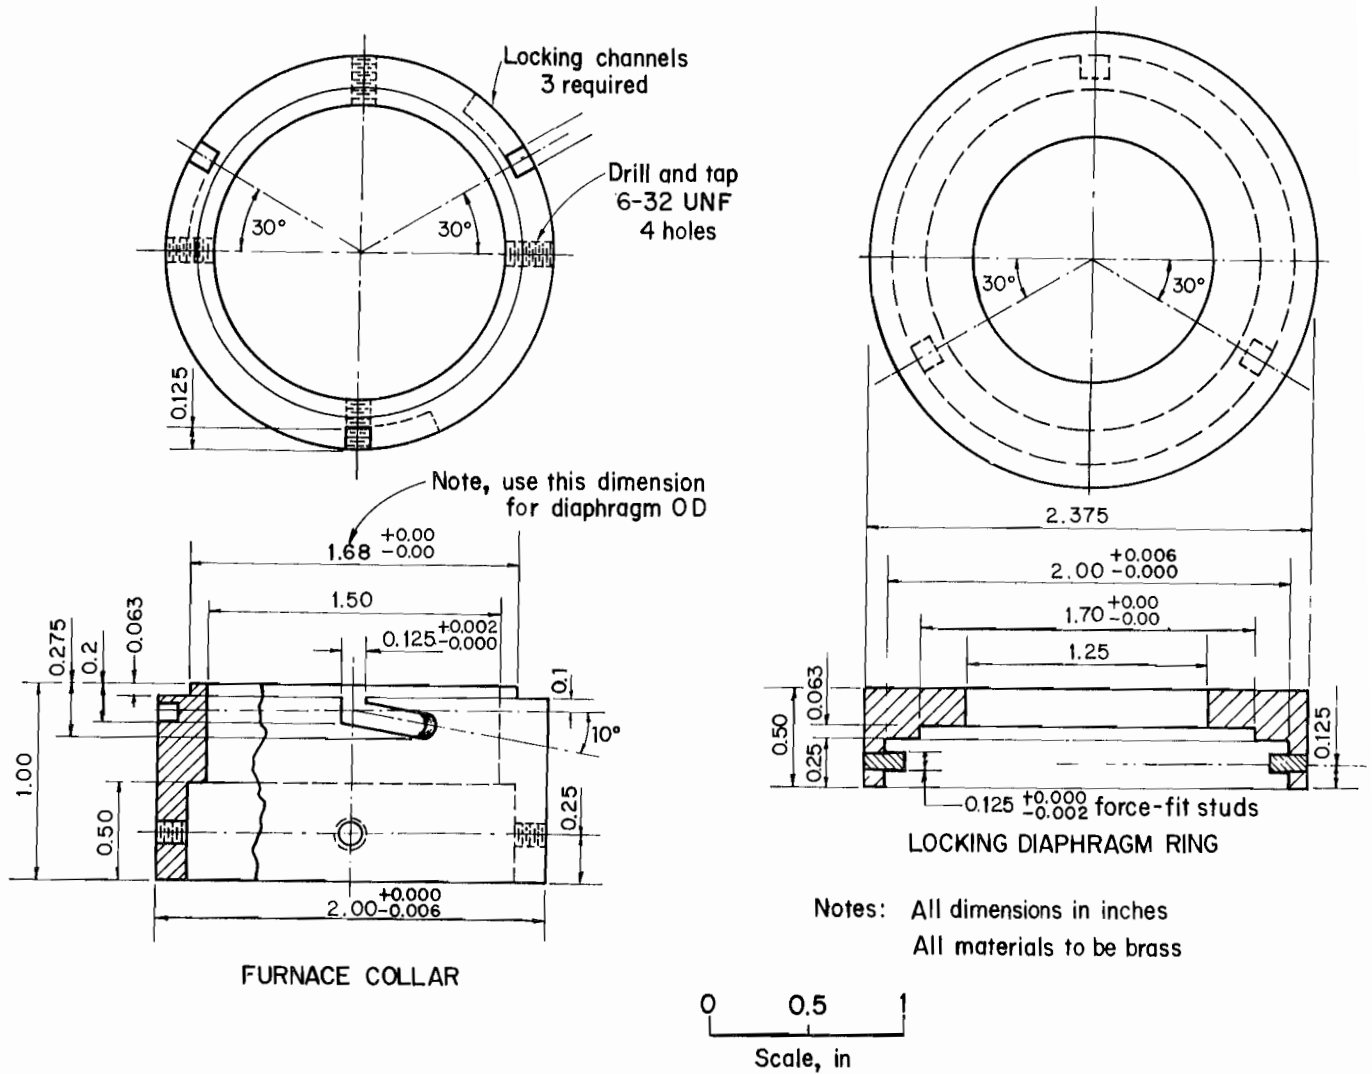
Collar and locking diaphragm ring for 1.2-L furnace.
